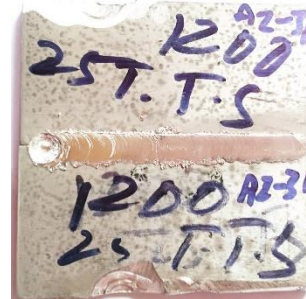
The weld made at 1200rpm at 25 tool traverse speed with similar welding Az31 alloy
